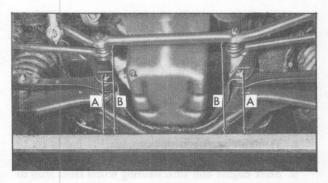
Steering Linkage Parallelism (Except Eldorado)
